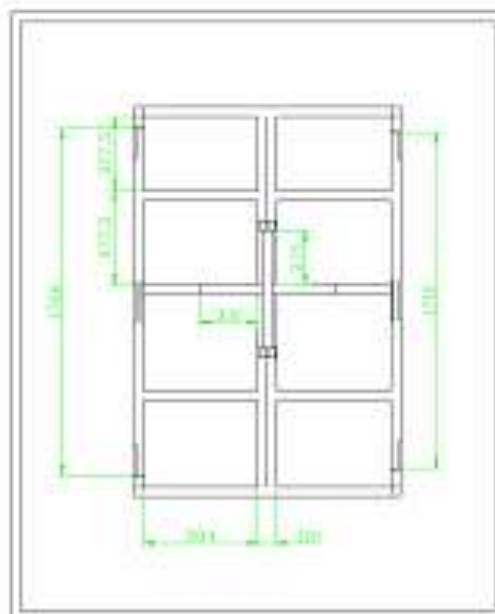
Technical drawing of Rack for fenders of machine L-580
